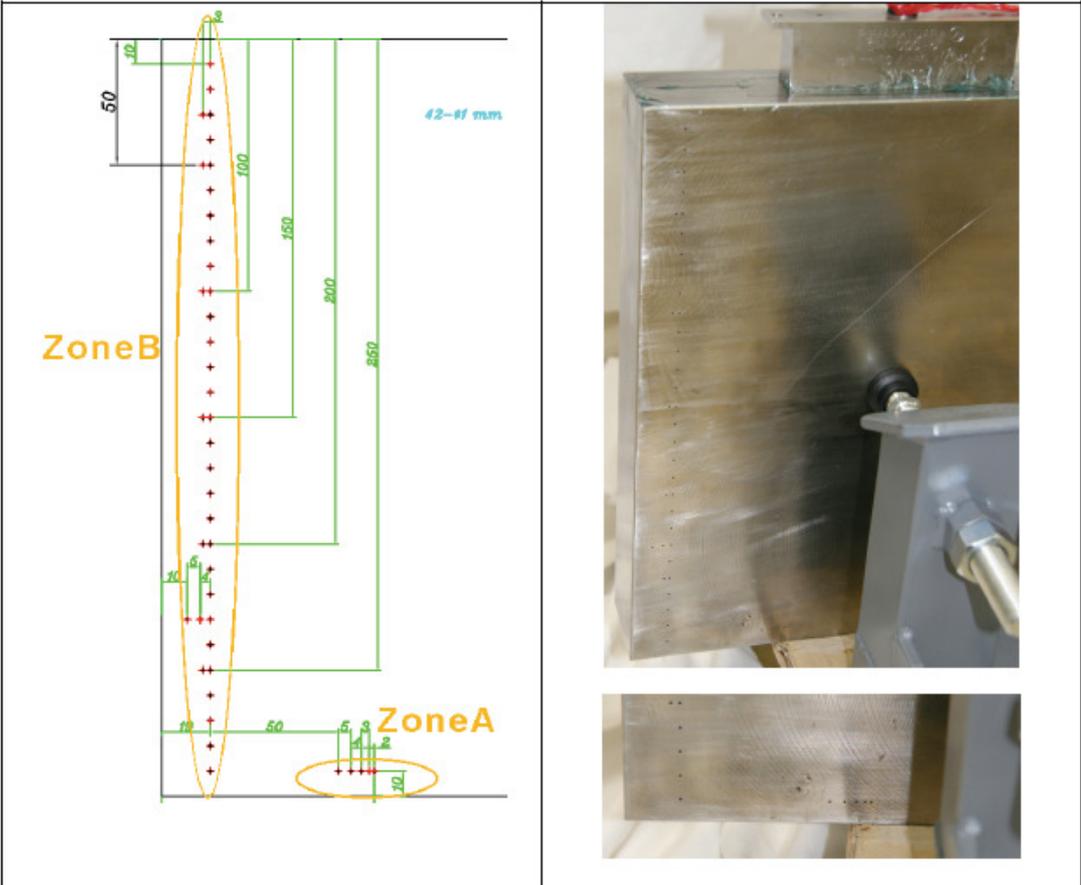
Drawing and photo of the sample test piece used for experimentation
